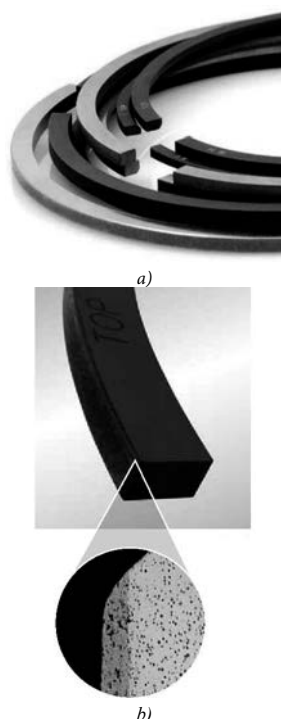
Design types of top compression piston ring (a) and molybdenum coating ring (b)
